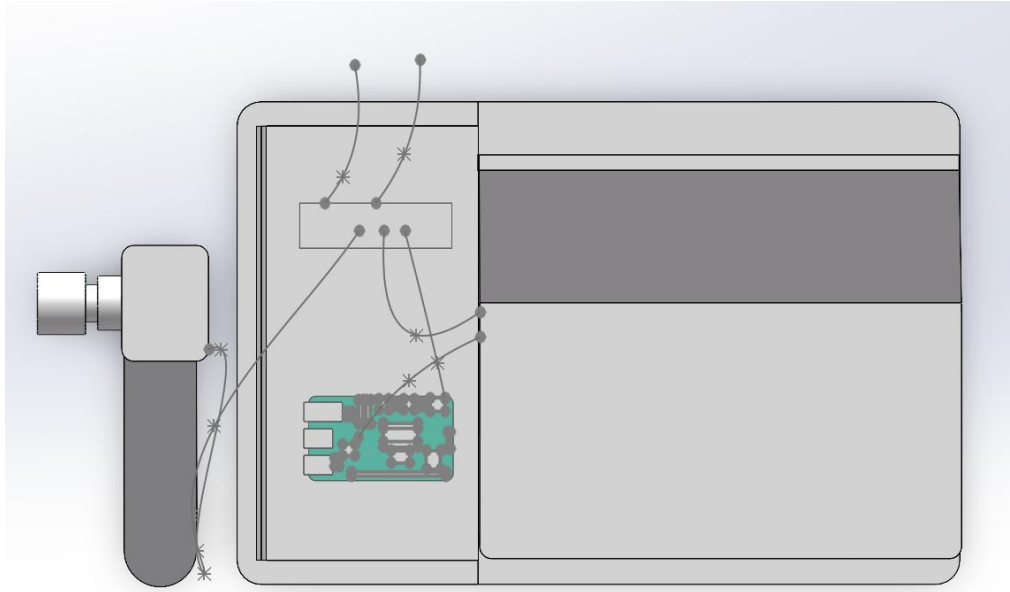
Top view of the outdoor enclosure showing internal component layout and wiring configuration.
